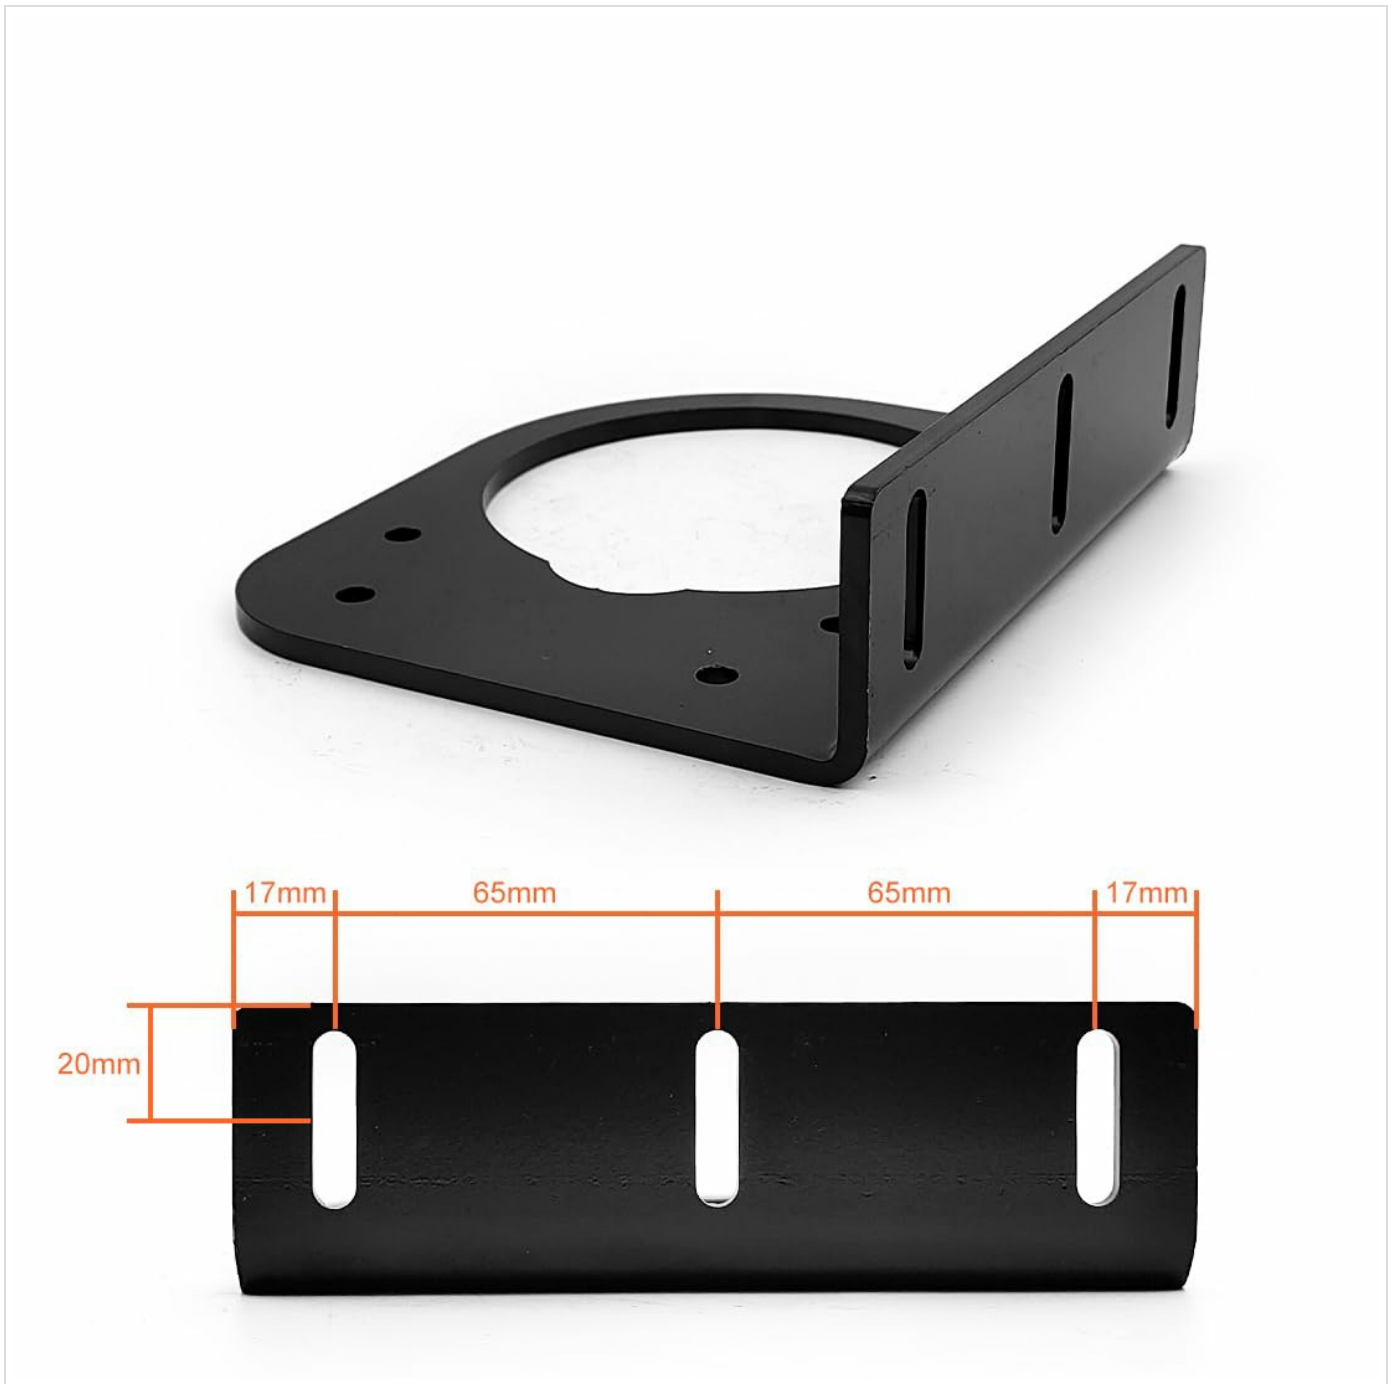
Top view of the motor bracket, showing mounting hole spacing (65mm between centers).
